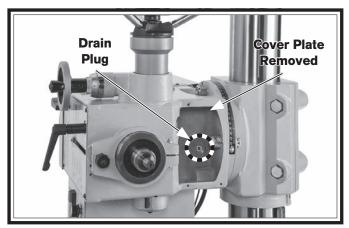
Headstock drain plug (headstock tilted 90° for clarity).
